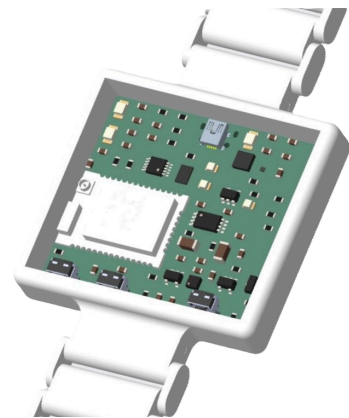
Zoomed-in view of the NeuroBoost PCB.
